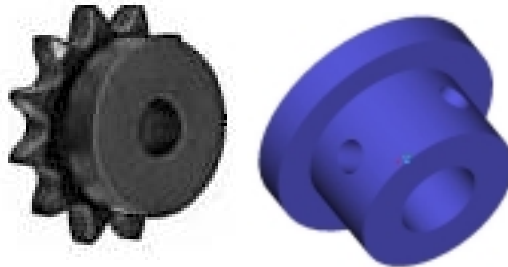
Plain Bore Sprocket as Purchased and Finished Motor Sprocket with Bored Out Center and Two 90° Set Screws
